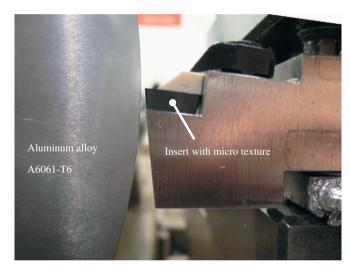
Orthogonal cutting experiment using a tool with micro surface texture.
